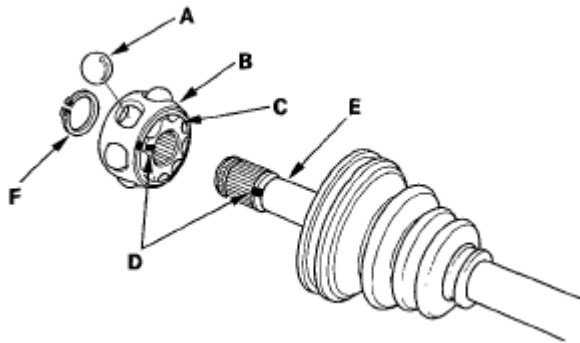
Identifying Steel Balls, Bearing Retainer And Bearing Race
